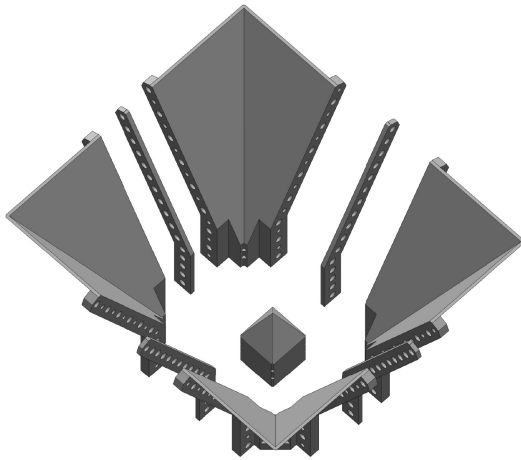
Exploded view of the nine parts of the horn to be printed.
